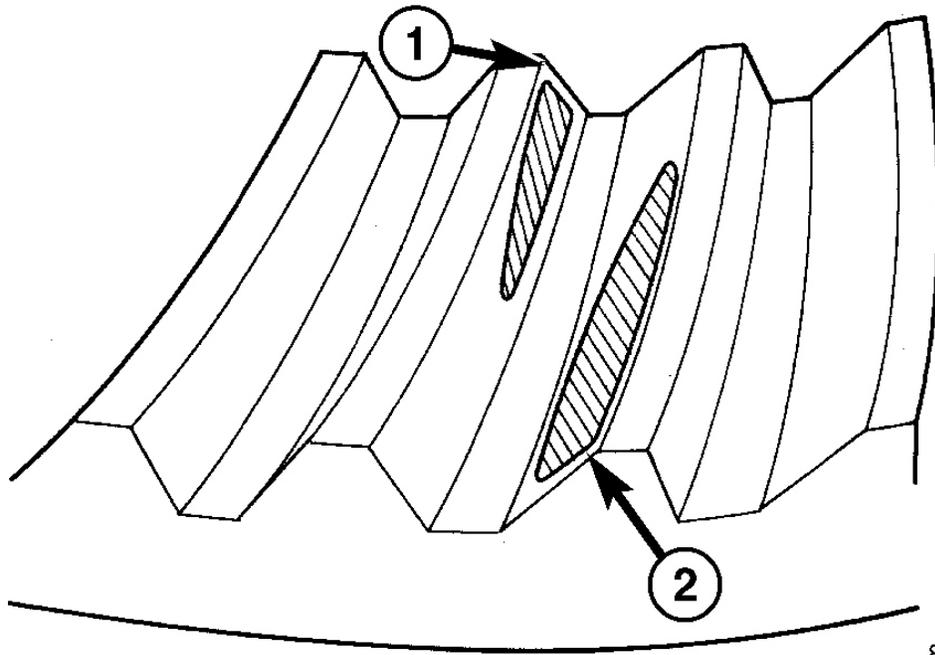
Identifying Coast Side Toe & Drive Side Heel
